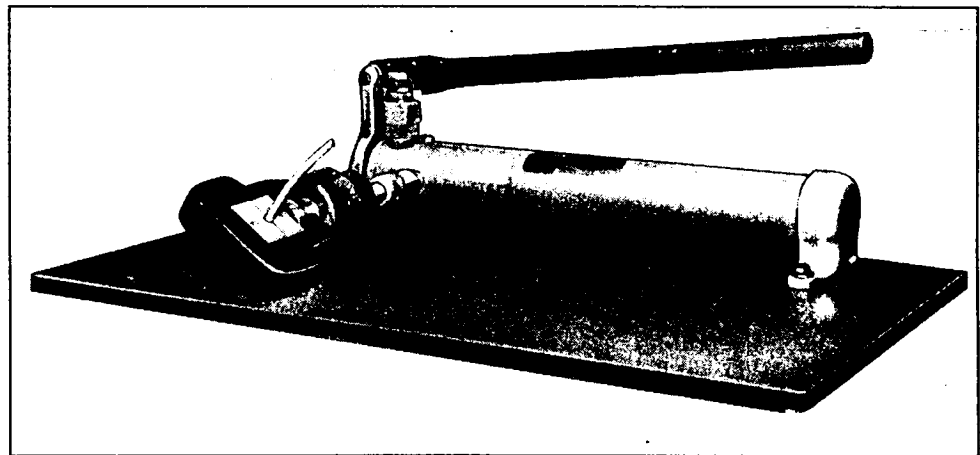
Die and Locator Assembly in Thomas and Betts Swivel Head\* with Thomas and Betts Hydraulic Pump\
